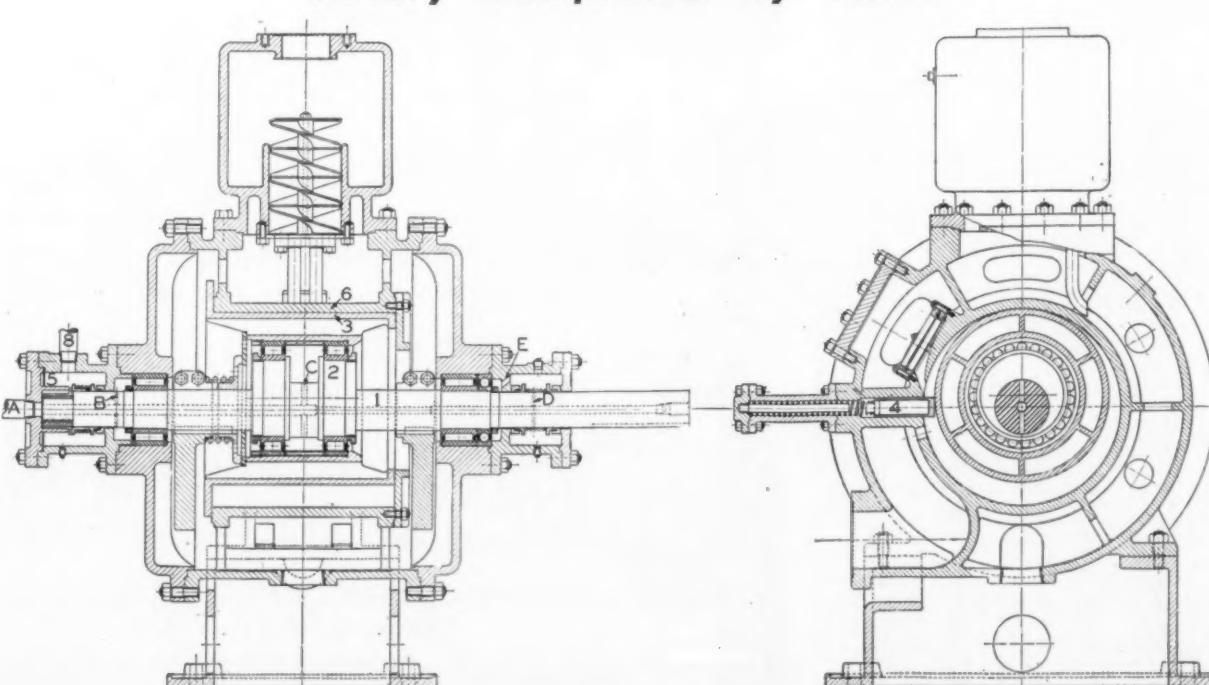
Sectional side and end views of rotary compressor made by Vilter Mfg. Co.
